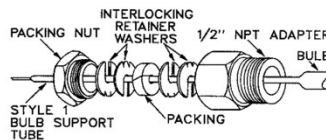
Part No. FTG13A-600R packing nut assembly. (Use with Style 1 bulb with support tube for direct immersion applications.)
